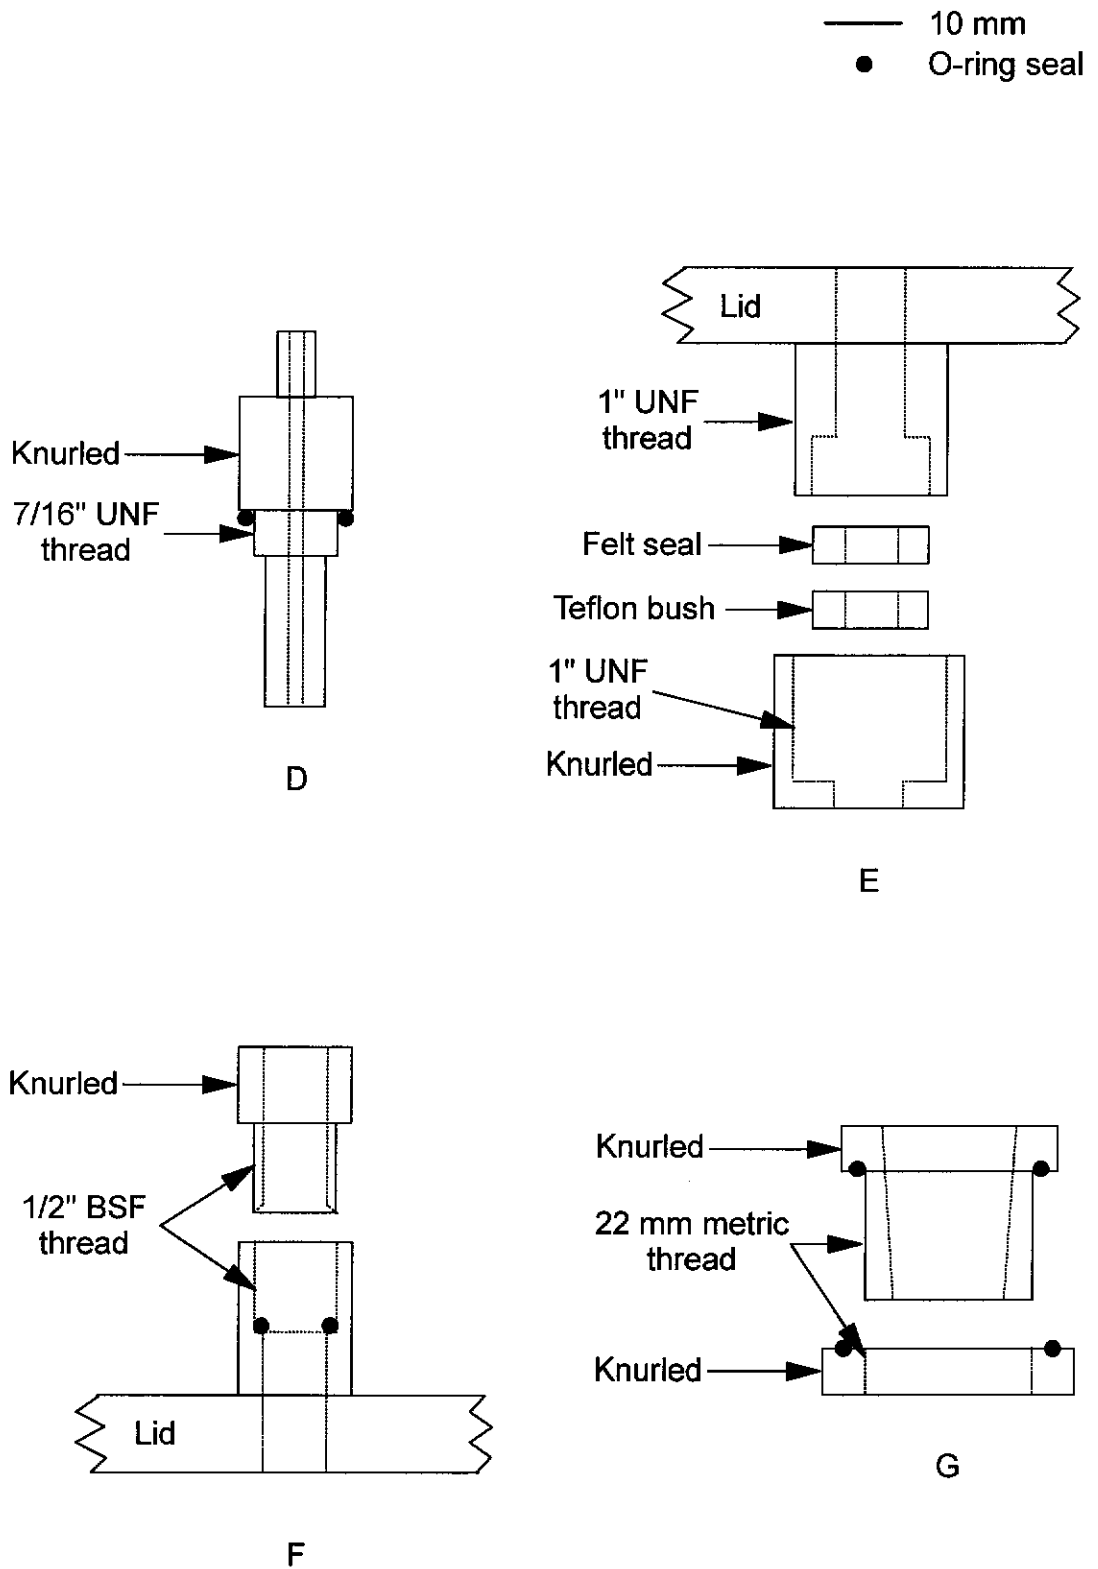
D-G: Cross-sectional view, dimensional drawings of the fittings for the reactor vessel lid.
